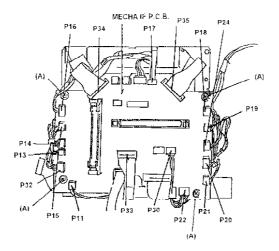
Connection of S & T Reel Rotor Unit
